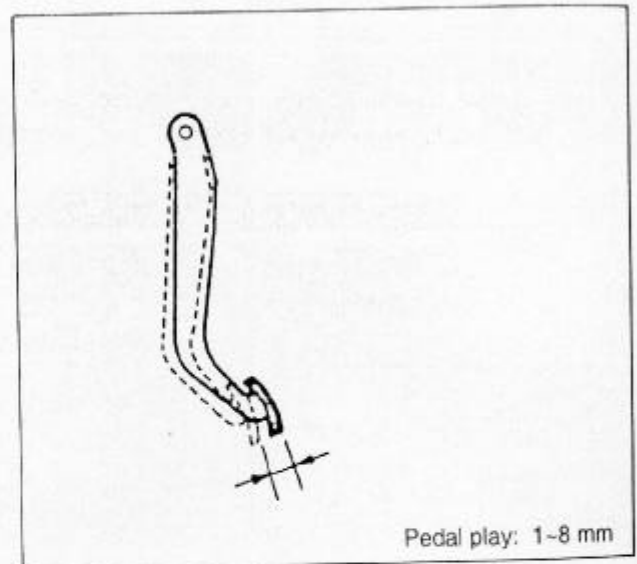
22 BRAKE PEDAL PLAY INSPECTION
